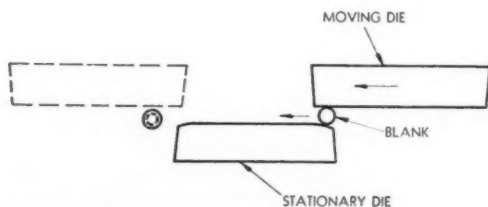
Reciprocating thread-rolling machines use two dies with rolling faces opposite each other
